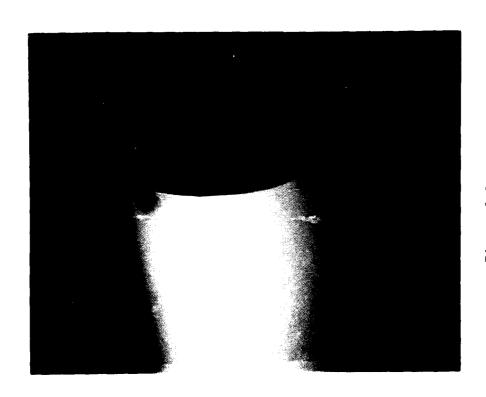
Rivet Hole Failure After 7,500 Impulses (0.025 Inch Skin)
